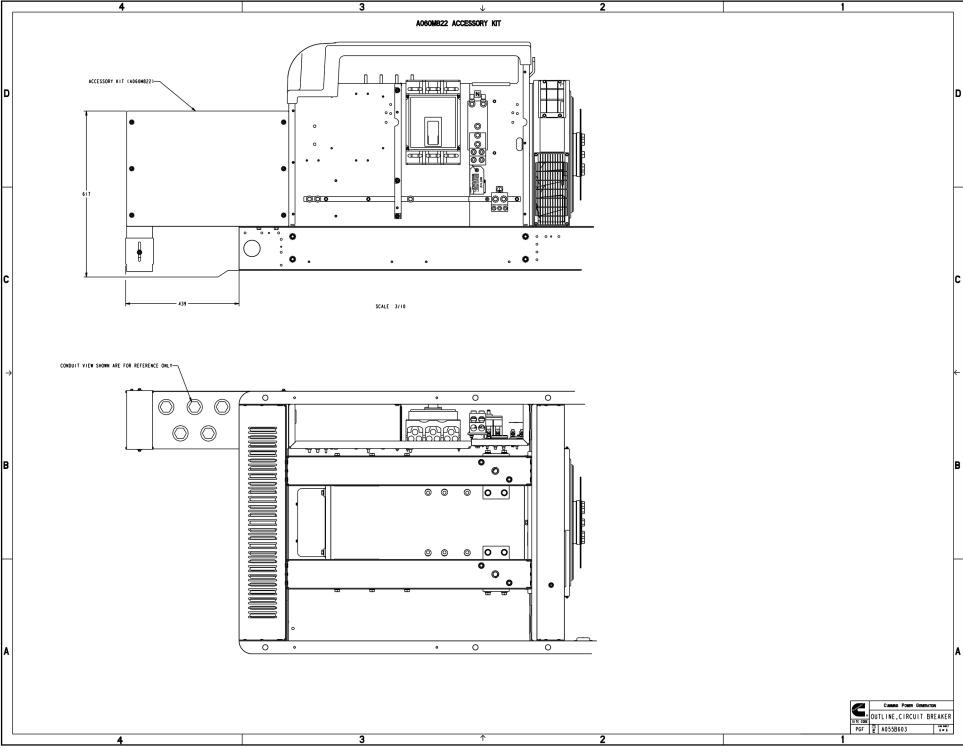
CIRCUIT BREAKER OUTLINE DRAWING (SHEET 6 OF 6)
